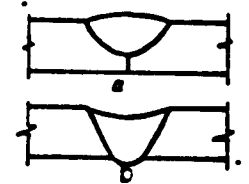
Shape of first seam. a) With double-sided welding; b) with single-sided double-pass welding.
